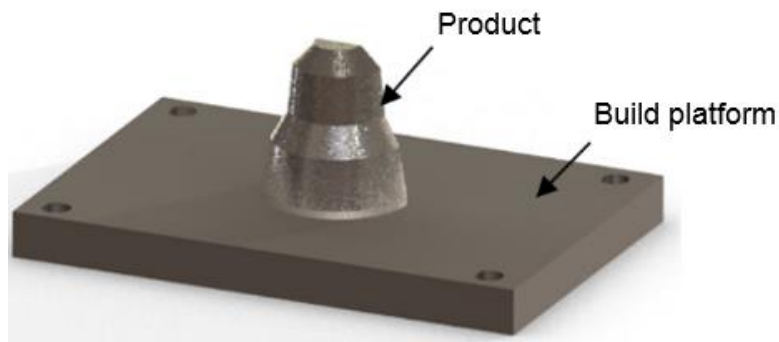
A DMLS product manufactured on a tool steel build platform.
